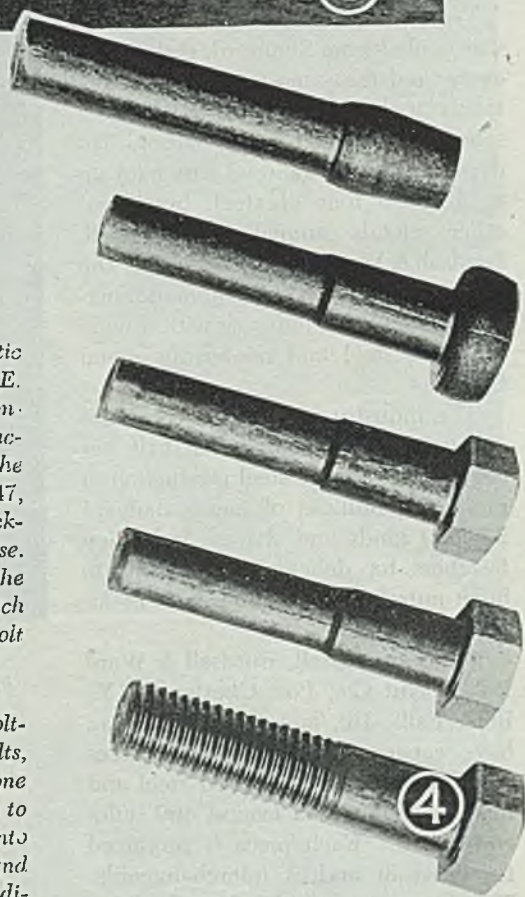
Steps in continuous production of bolt in machine shown in Figs. 2 and 3
